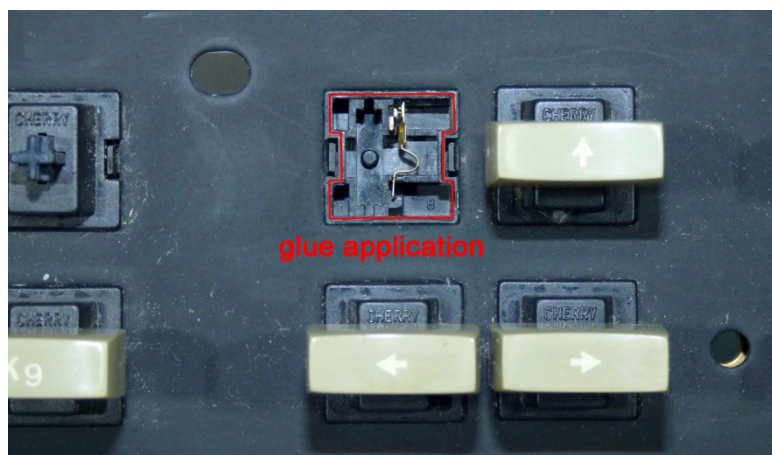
A thin thread of epoxy can be applied to the outer rim of the case and then the upper part including the plunger can be inserted carefully. Make sure that the small helical spring is in place (not yet installed on its pin in this picture) and that the pin on the plunger engages properly into the spring.
